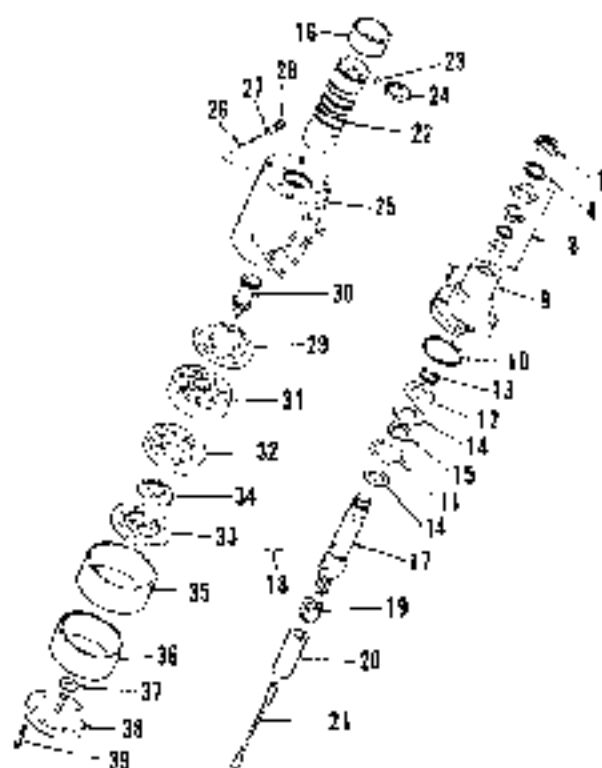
Exploded view of steering control valve assembly (hydraulic hand pump) used on standard MF243 models.
